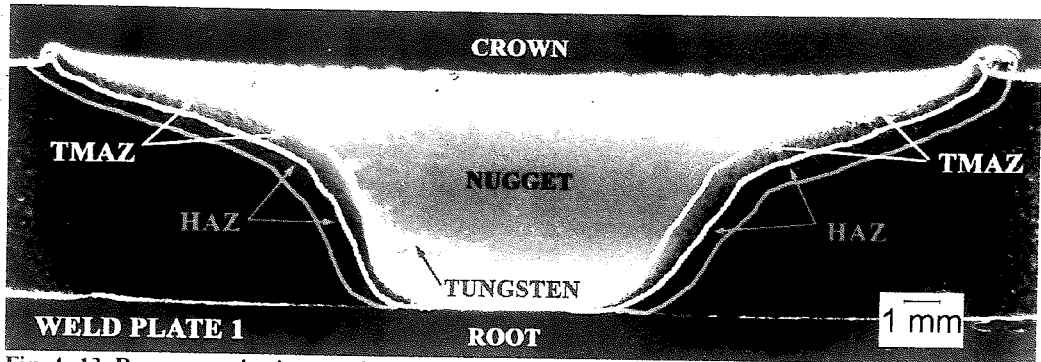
13 Representative image of a single-sided FS weld on AL-6XN plate.
